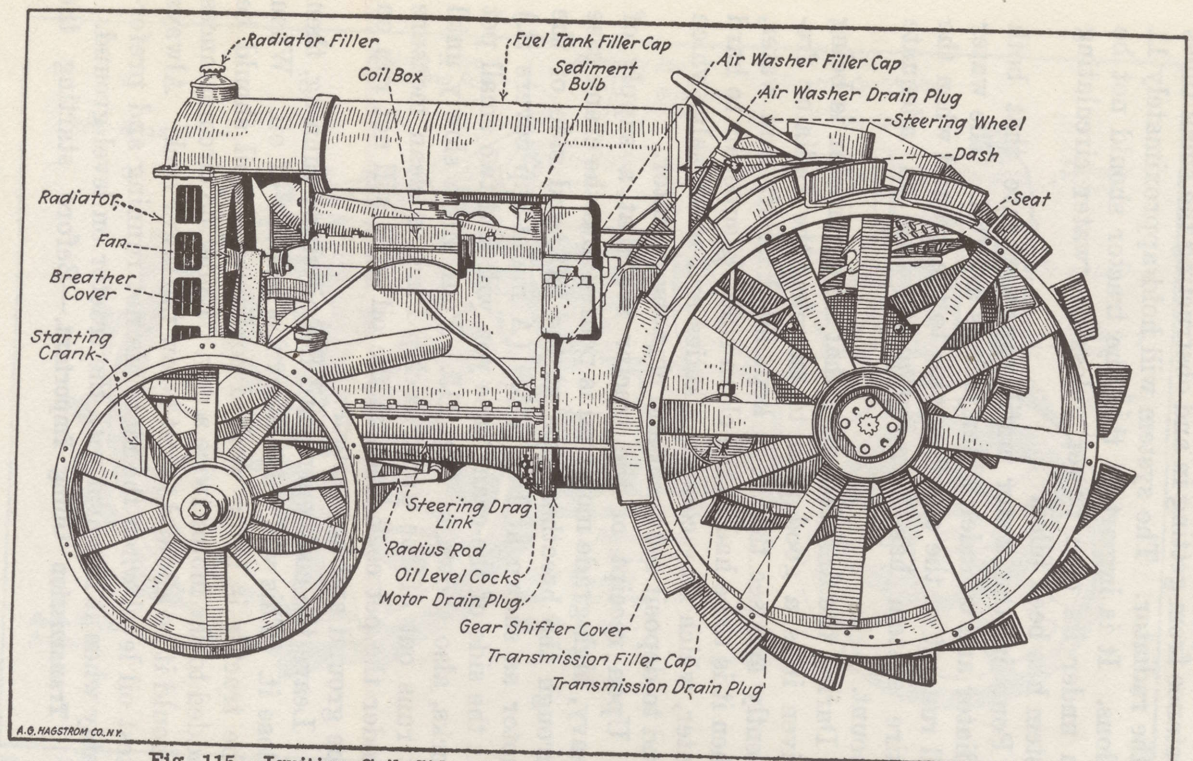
Ignition Coil Side of Fordson Tractor Showing Air Washer Location.
